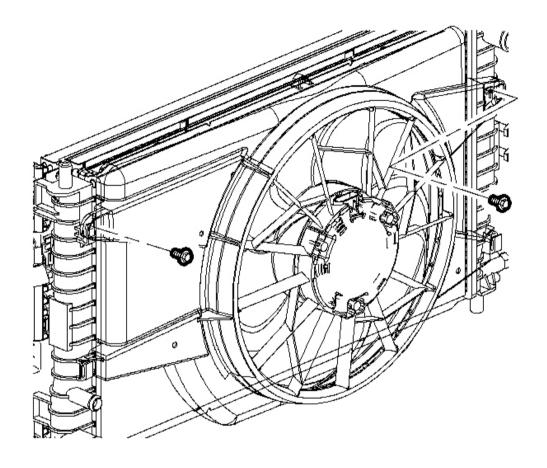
View Of Fan Assembly Bolts From The Radiator Courtesy of GENERAL MOTORS CORP.
